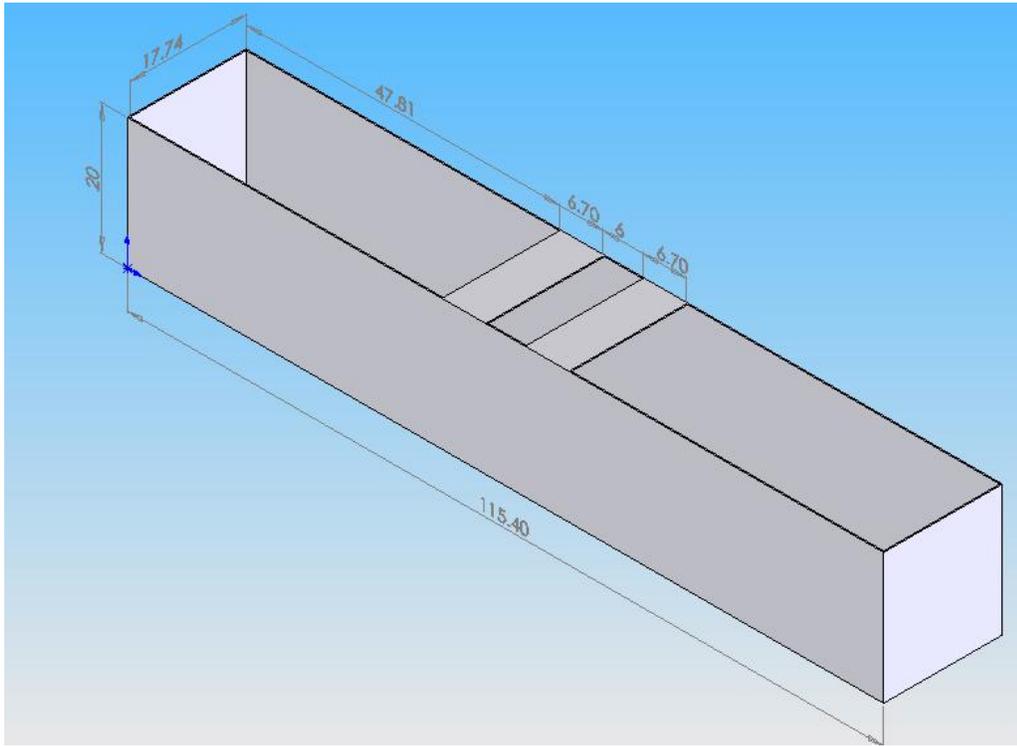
SolidWorks Model of the container with dimensions in centimeters
